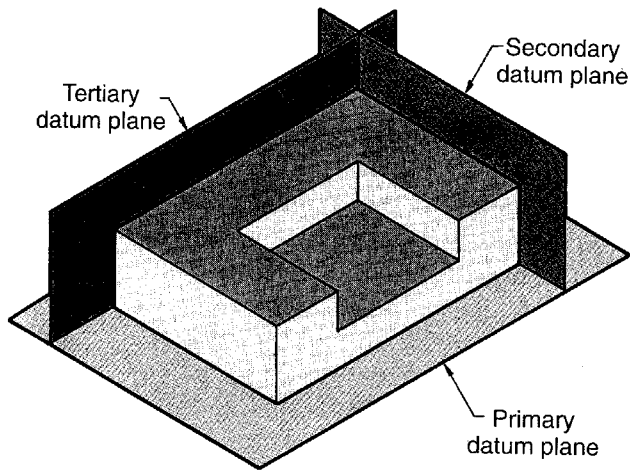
Datum references are perpendicular planes. The first datum referenced is the primary datum, followed by the secondary and tertiary datums.
